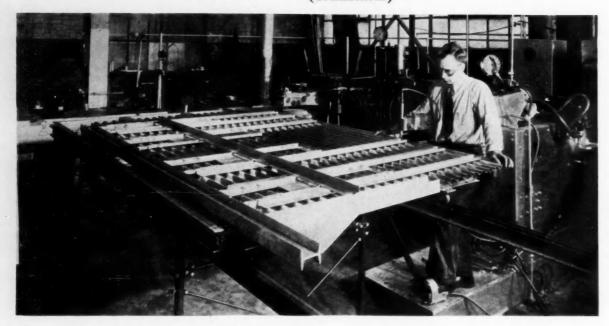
Movable for Supporting Flat Panels for Spotwelding, and Jig for Spacing Stiffener Channels
